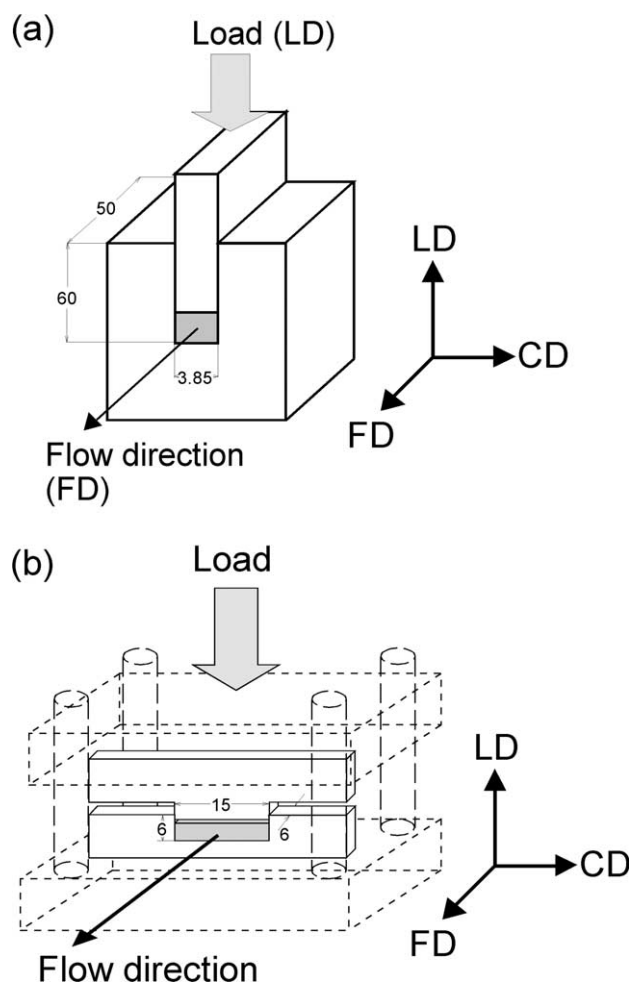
Deformation tools used for plane-strain compression: (a) Deep channel die, (b) small die. The compressed sample is marked gray. In (b) the guidance fixture is shown with broken line. Dimensions given in mm.
